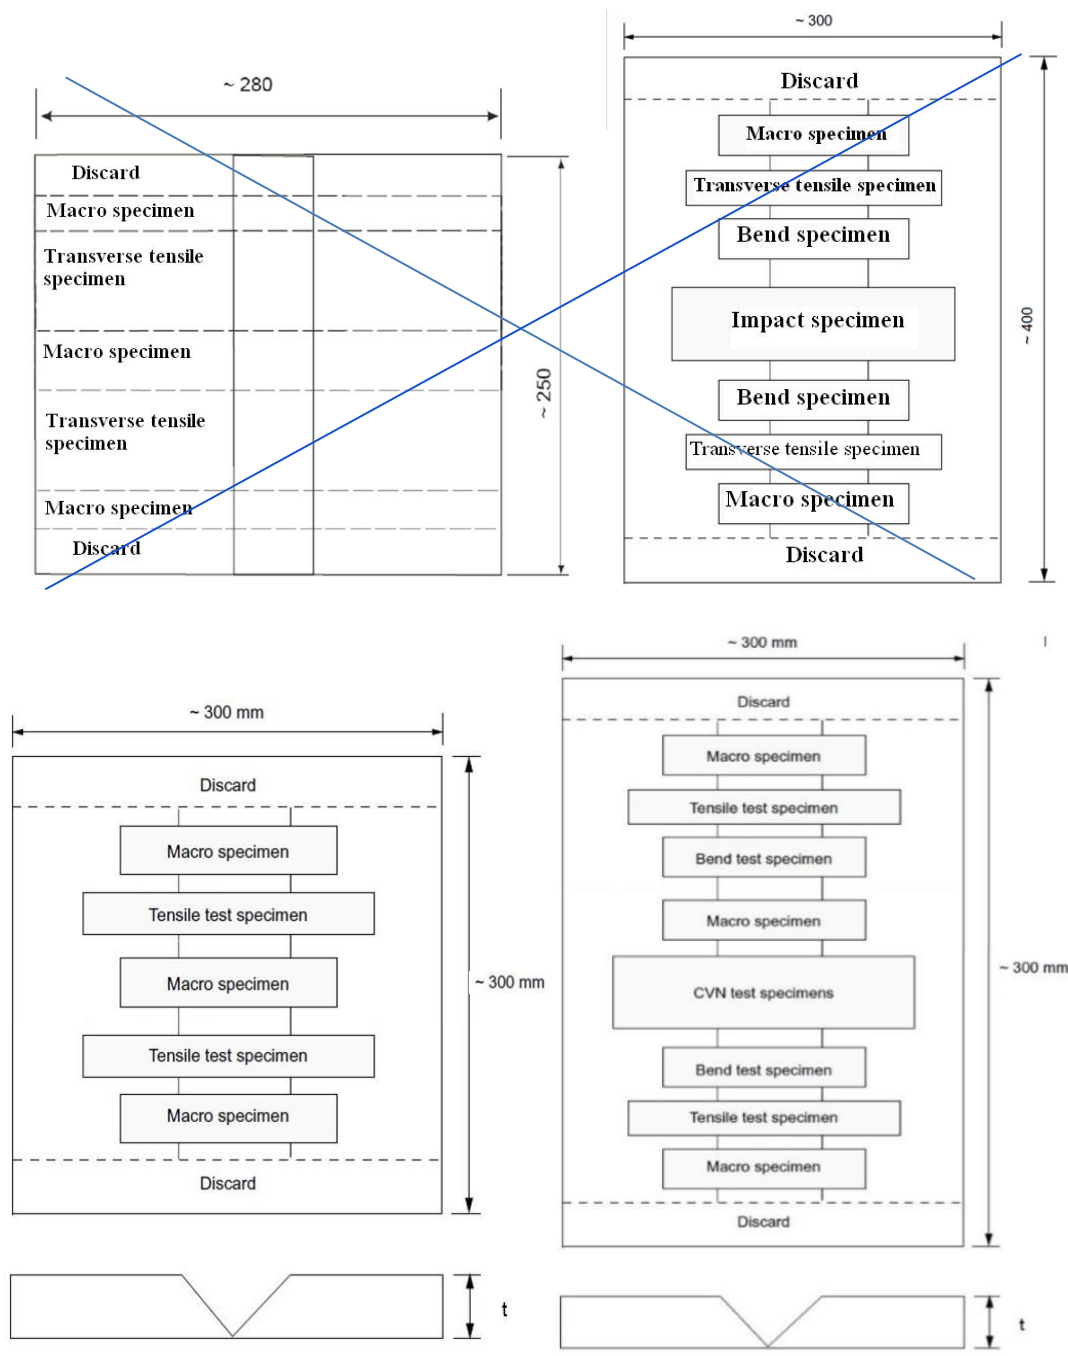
Test specimen locations for approval of repair welding techniques for propeller
